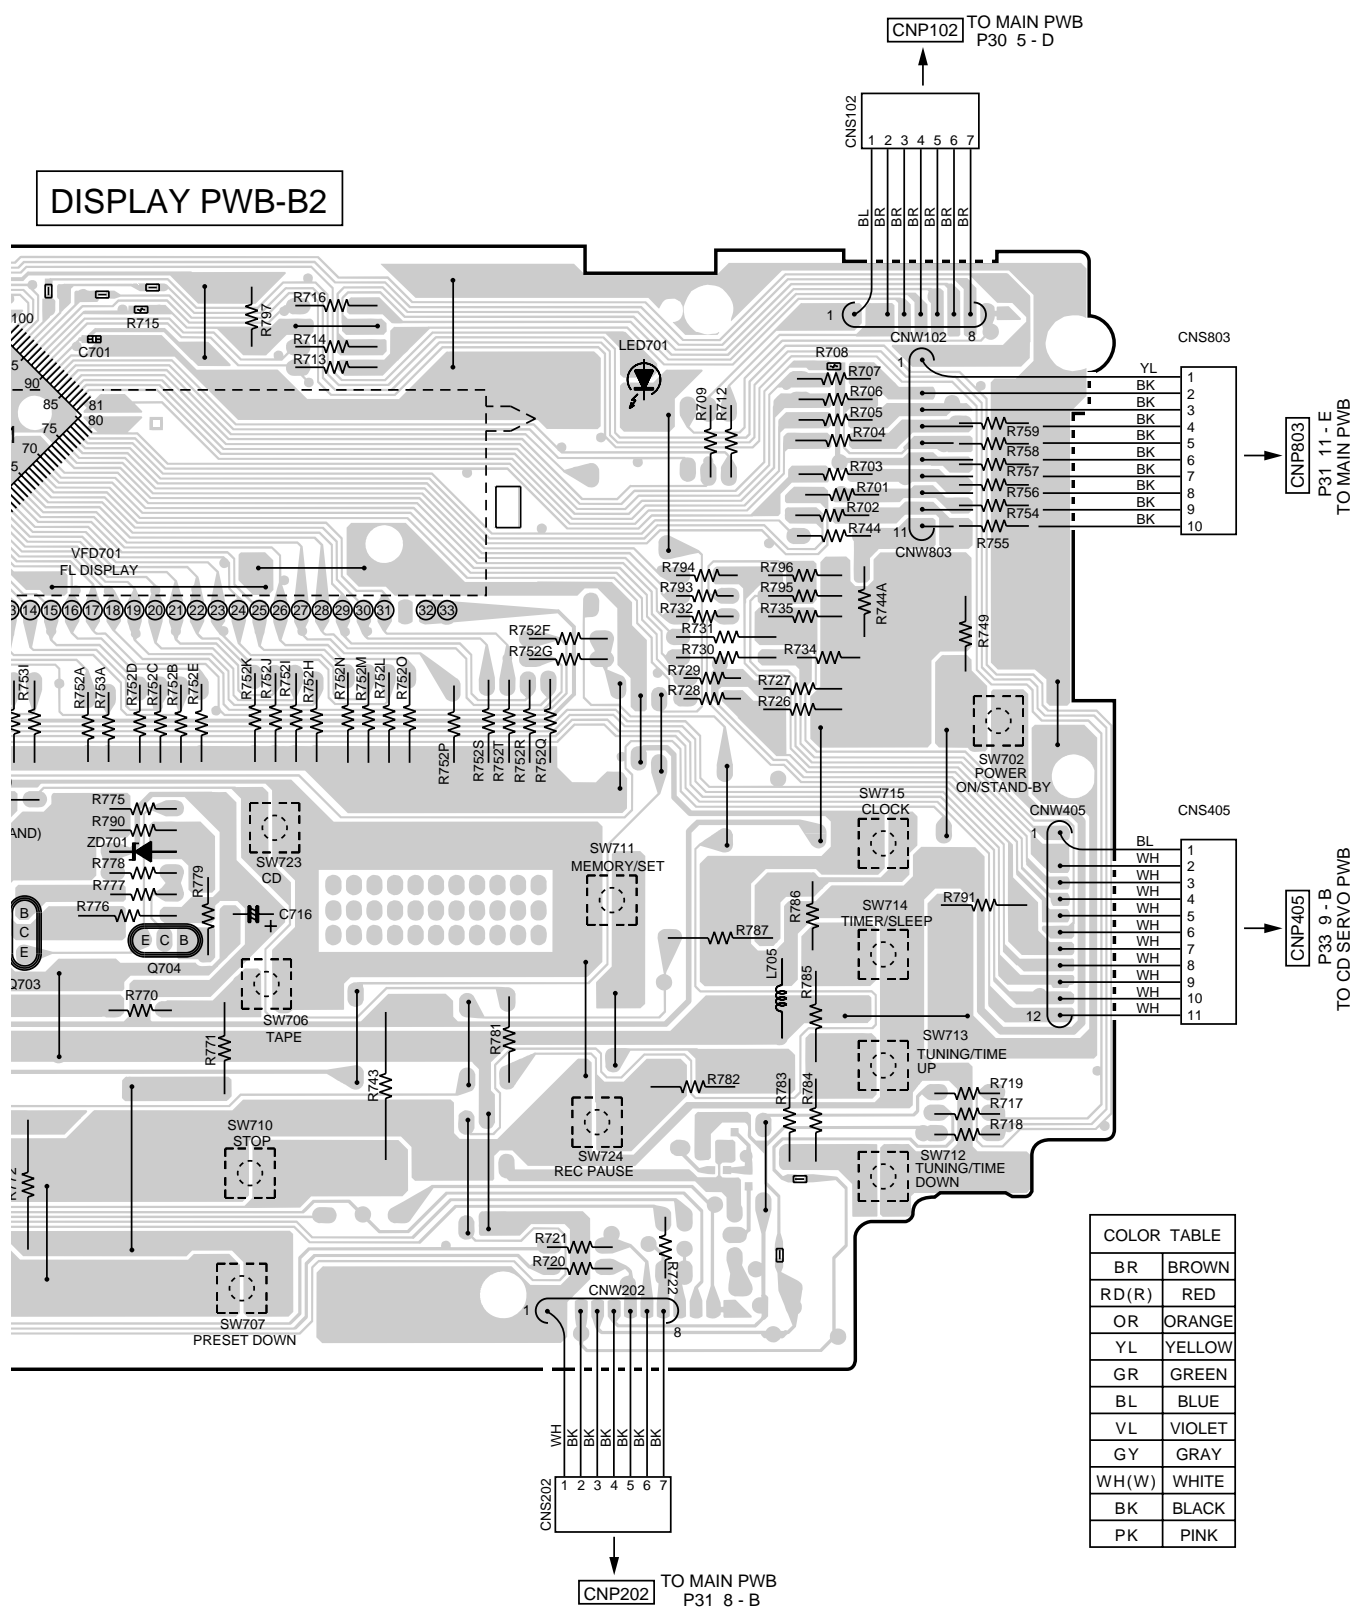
WIRING SIDE OF P.W.BOARD (6/8)
